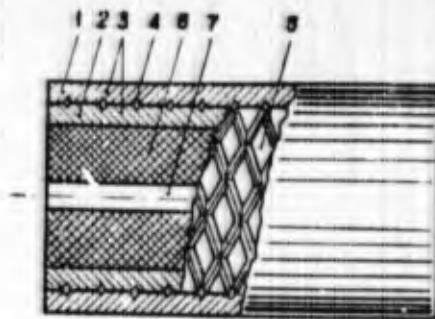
Schematic diagram of the explosive section of a warhead with telescopic container assembly. 1. exterior tube; 2. interior tube; 3. container; 4. scoring pattern of the exterior tube; 5. scoring pattern of the interior tube; 6. explosive charge; 7. space for insertion of the detonating stage.
